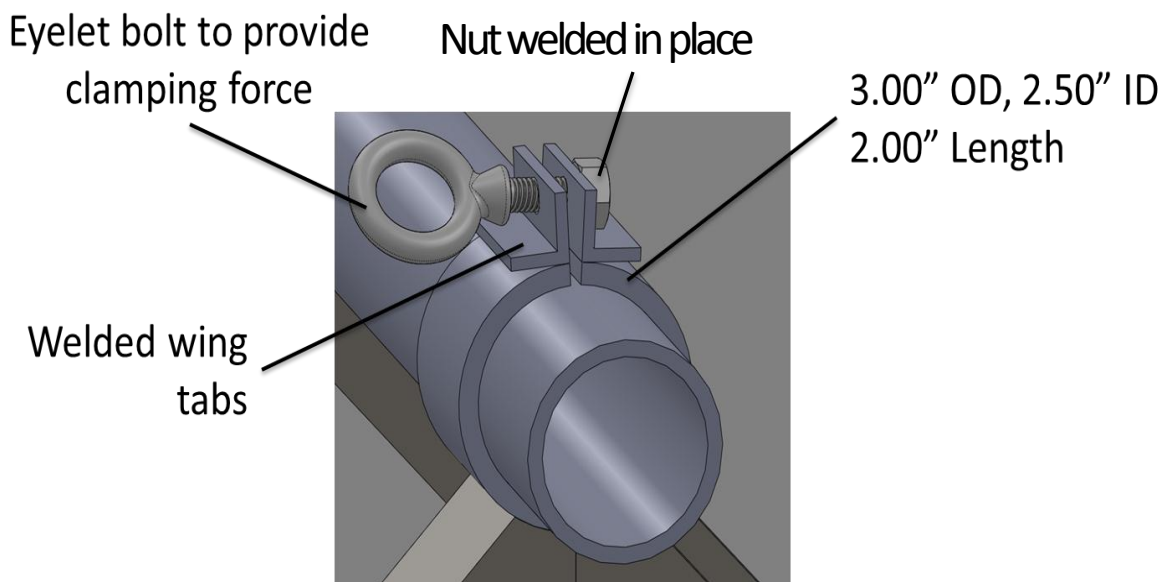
Detail view of winged tube clamp with some dimensions shown.
